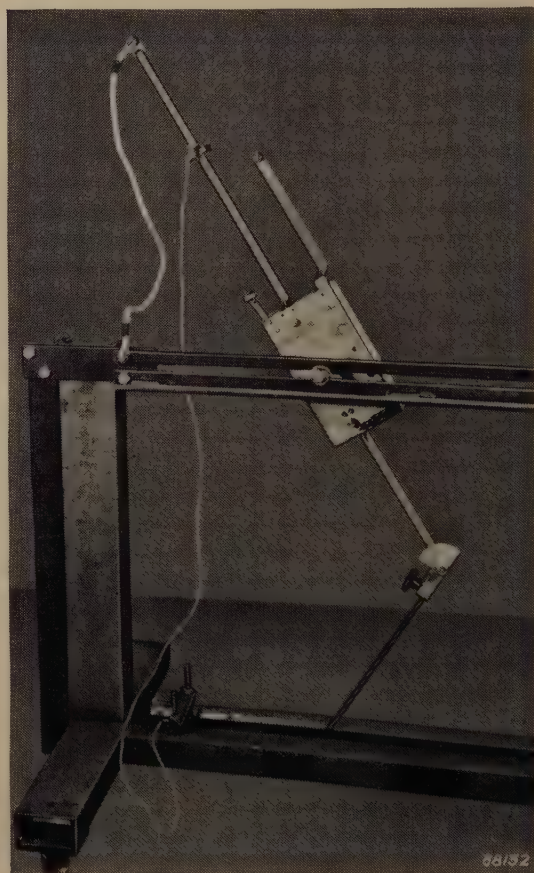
The Contact automatic welder, mounted in the position for welding.
